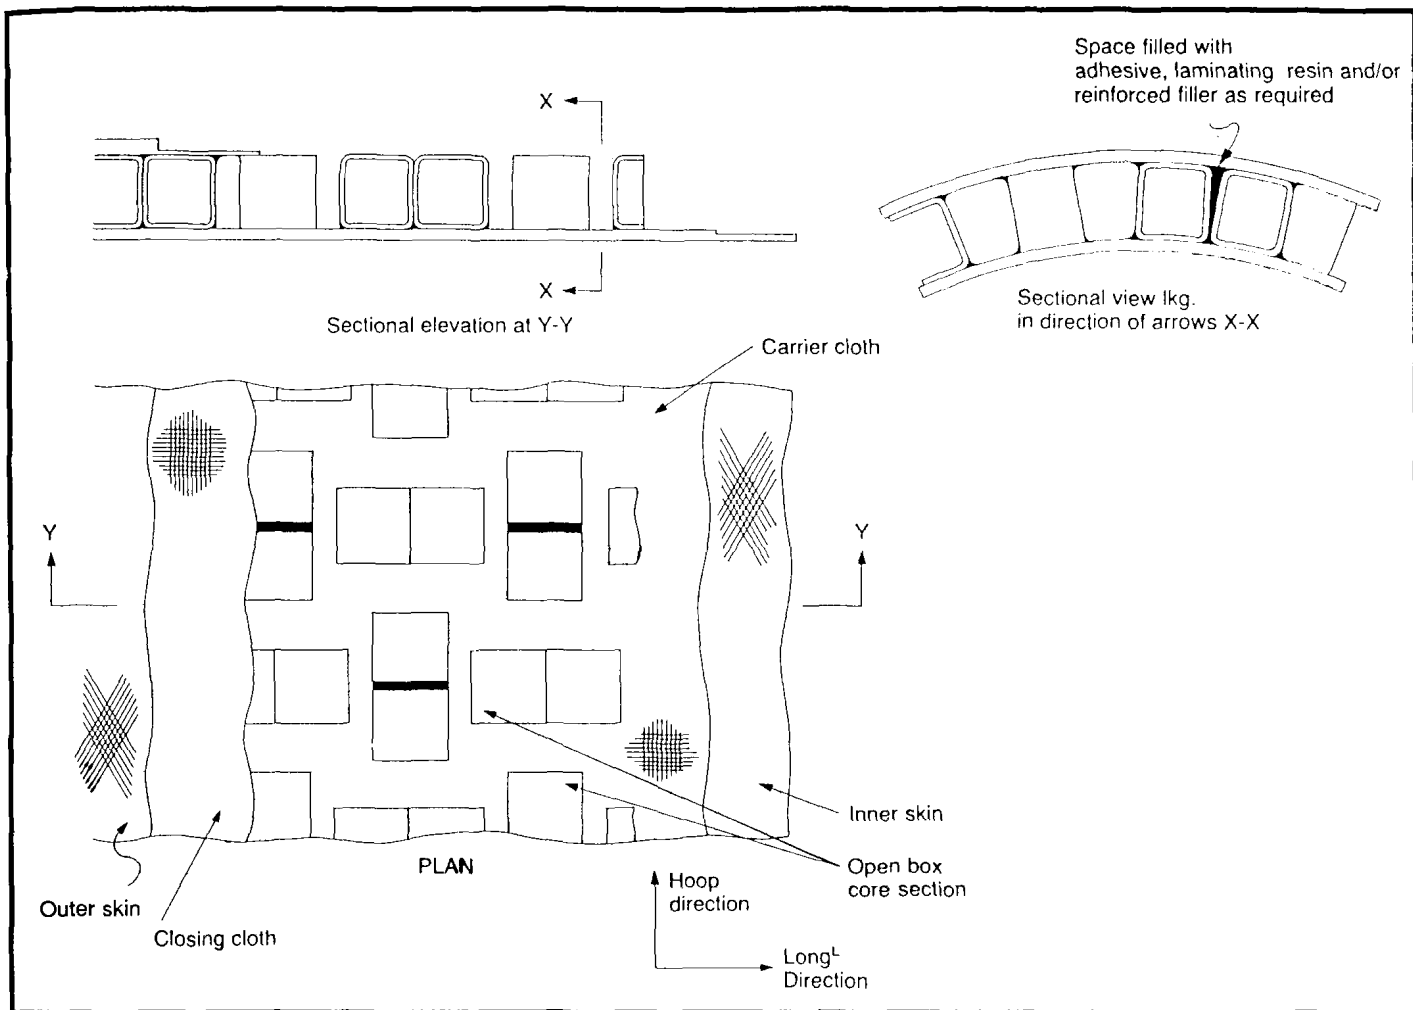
Cut-away view of GRP sandwich pipe construction, showing open box core arrangement
